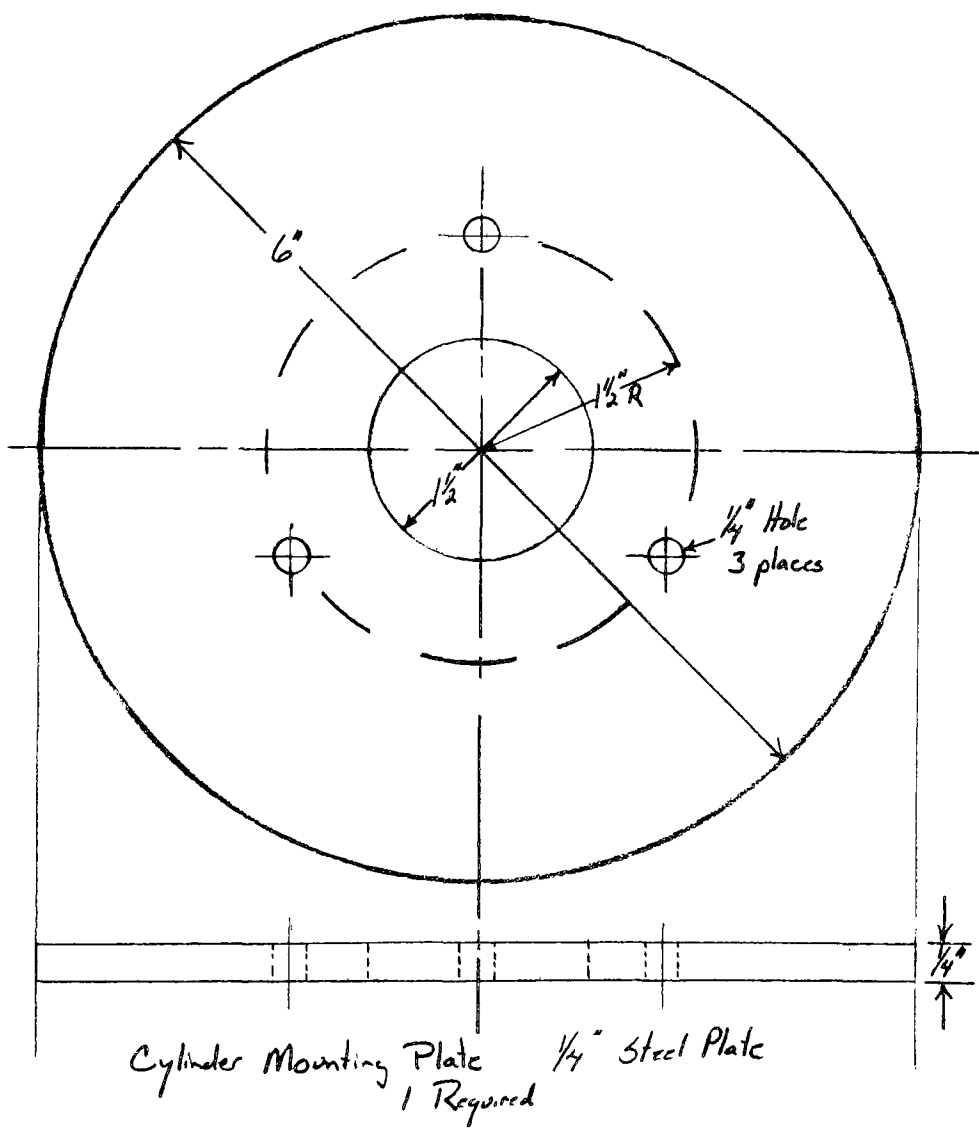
Detailed drawing of the bottom cylinder mounting plate.
